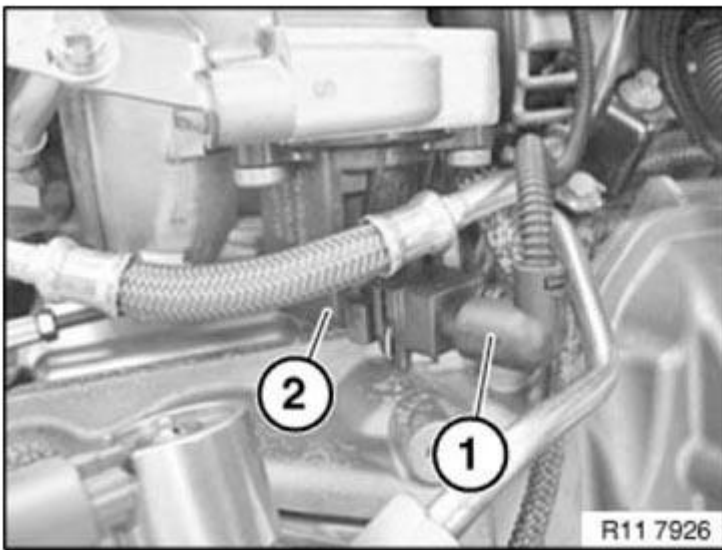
Identifying Plug Connection On Electric Changeover Valve
